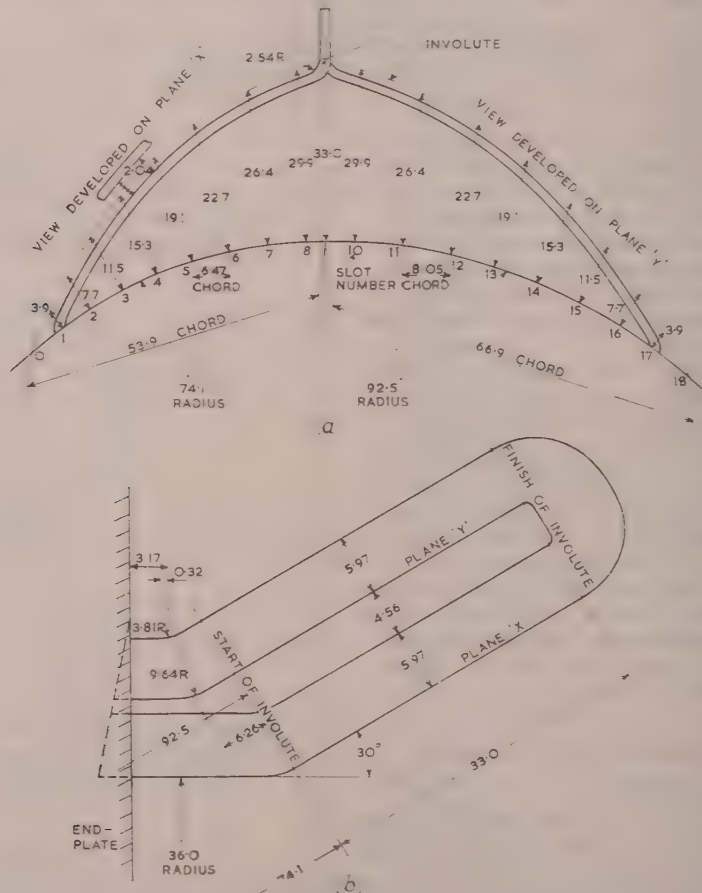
Reproduction of the manufacturing drawing for an involute stator coil.
